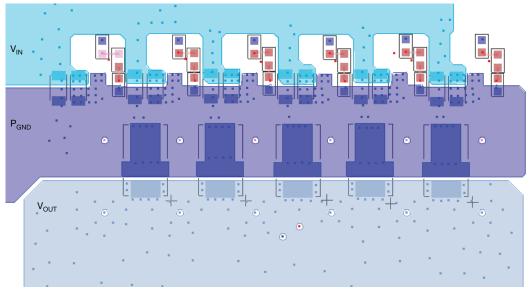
Multi-Phase VRPower Layout Bottom View
